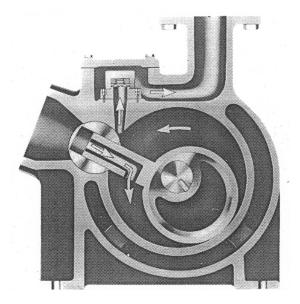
Rotary piston pump. (Courtesy Kinney Vacuum Co.)
